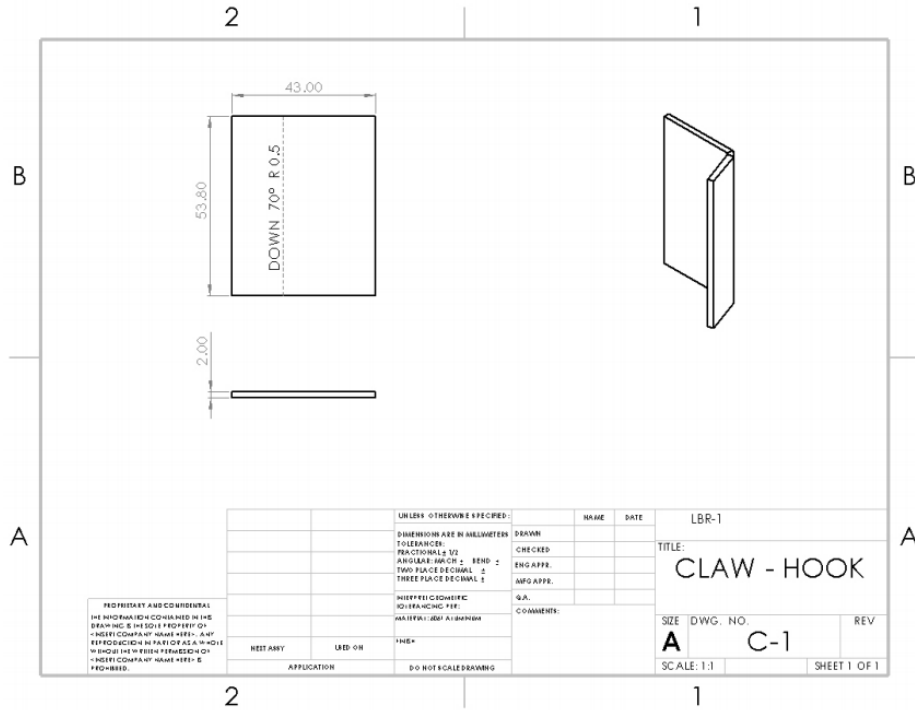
Part drawing of the claw's hook for the cube latch assembly
